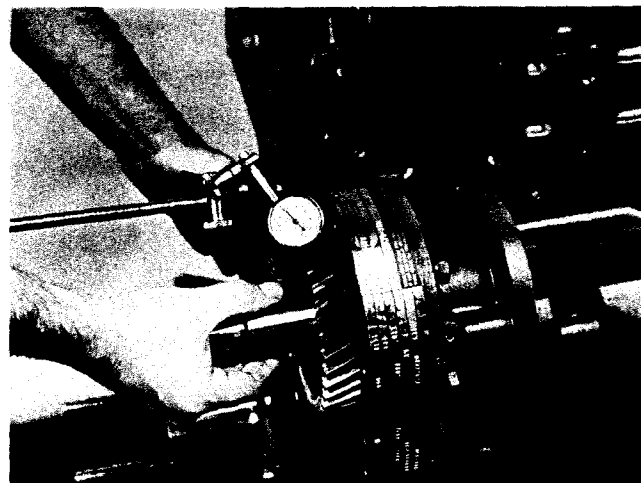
, (N114263). Checking accessory drive gear backlash
